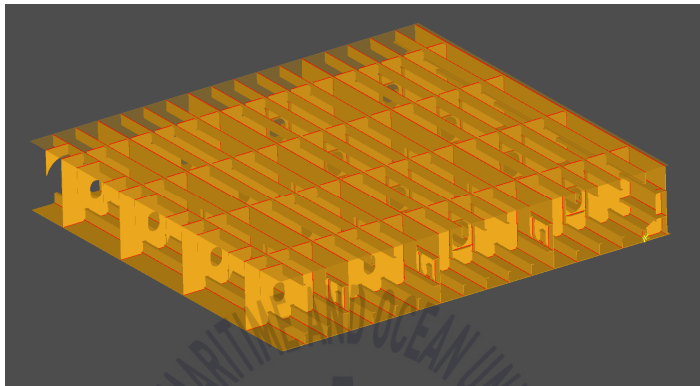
Estimation of welding seam from geometric shape
